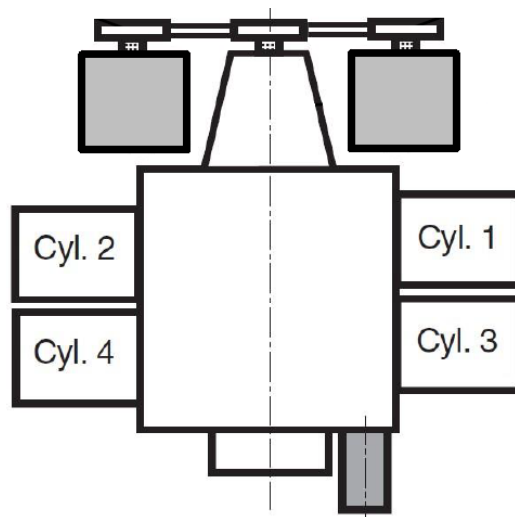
Mounting Layout Double Alternator Kit on Bank 1 and Bank 2 Side
